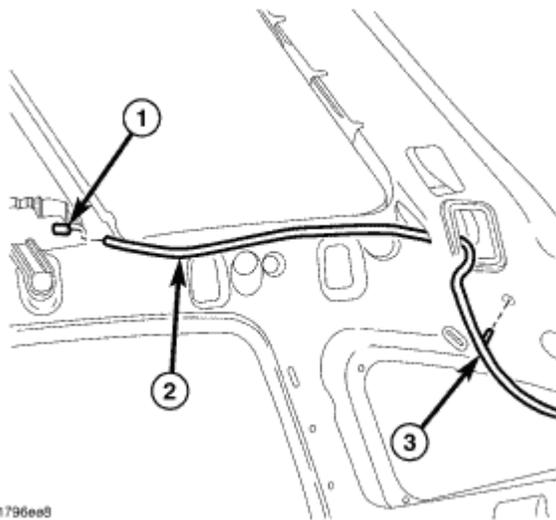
Sunroof Assembly, Rear Hose & Support Clips
